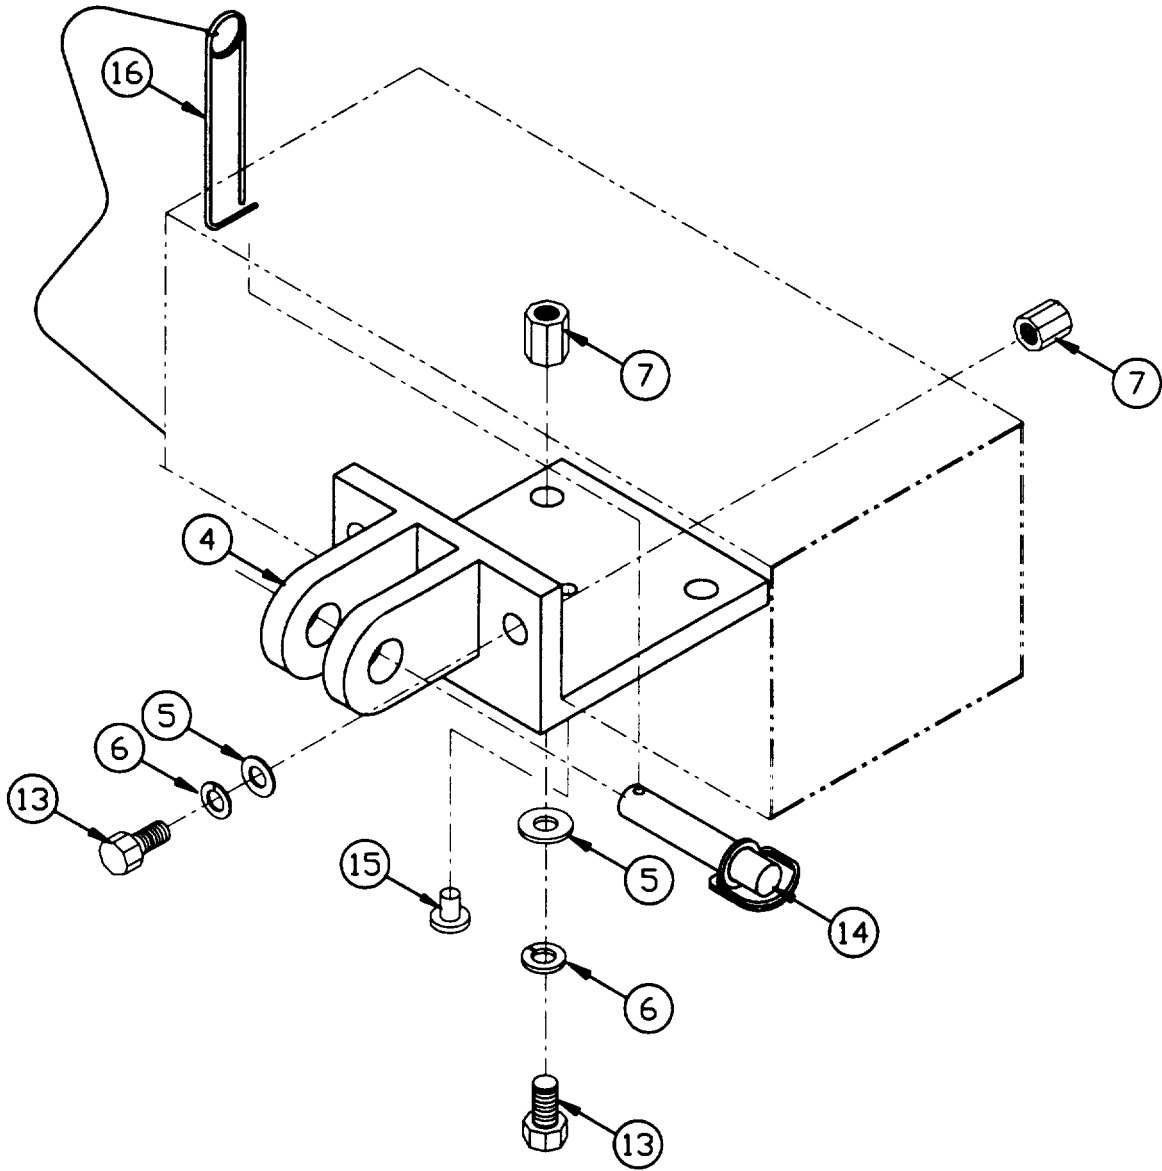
STEP AND LADDER ASSEMBLY (SHEET 2 OF 4)
